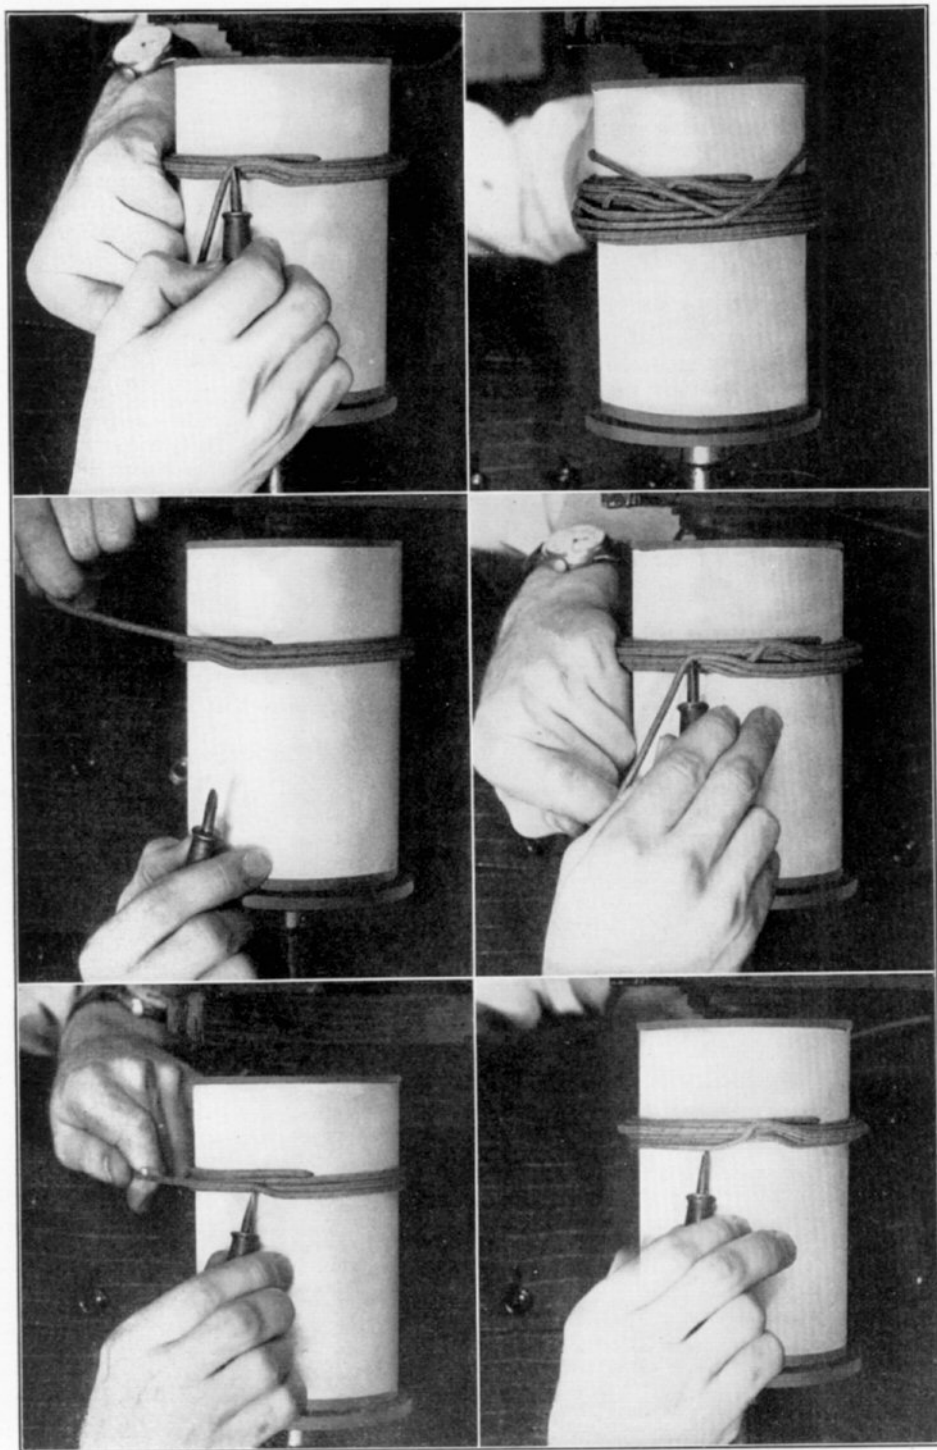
Six views of the steps employed in winding and tapping a three banked inductance. Heavy wire is used to give a clear idea of the position of the wires
